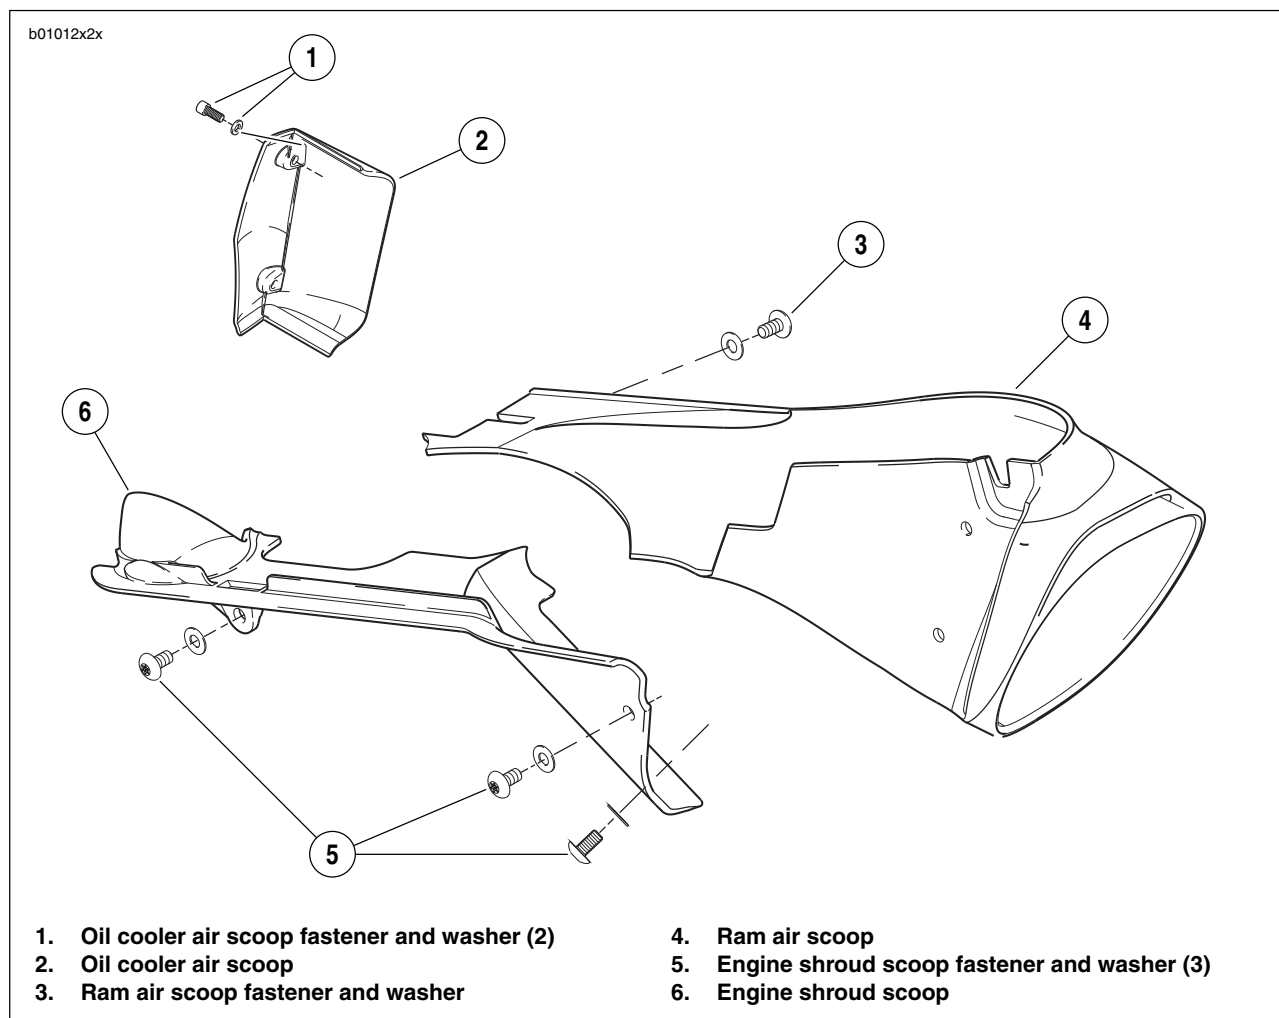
Ram Air Scoop, Engine Shroud, Oil Cooler
